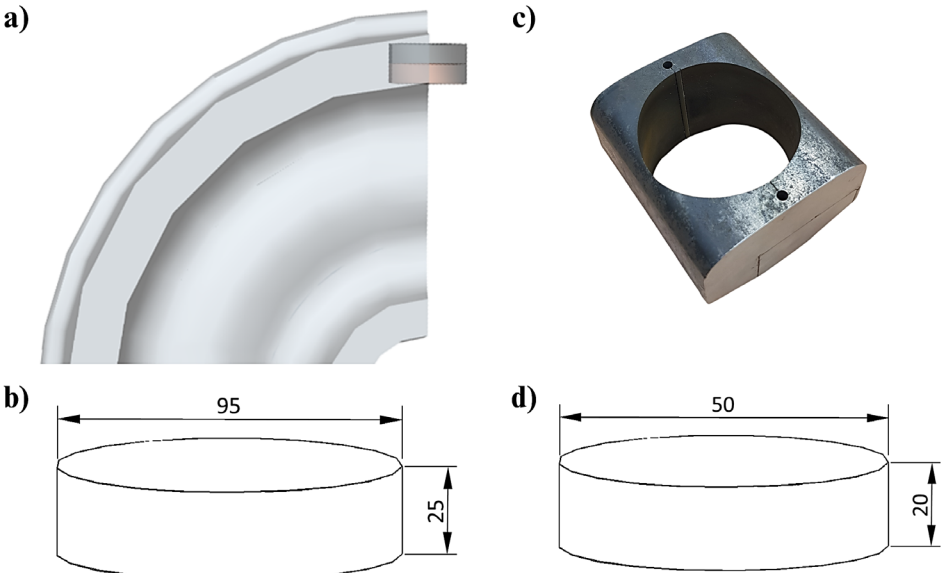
(a) Position where the build plates were taken from the wheel rim. (b) Machined size of each ER7T build plate (c) A small build plate was machined from the rail head – the diameter was limited by the semi-flat top surface of the virgin rail. (d) Machined size of the R260 build plate, which was then fitted to a sample holder to fit the M100 printer (see Section 4.5). All units in [mm].
